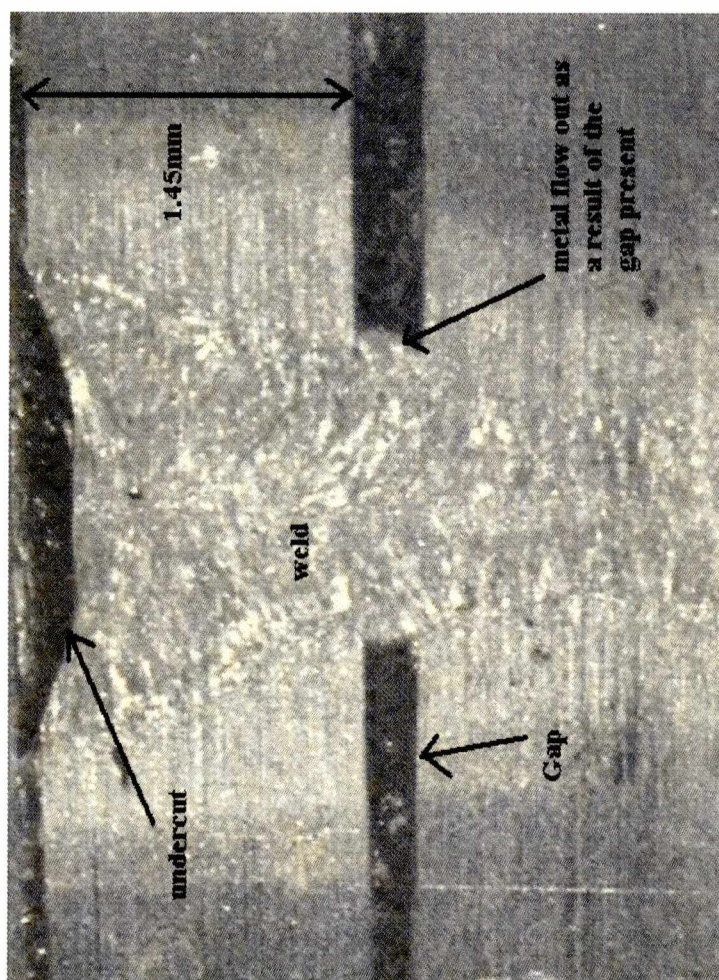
Gap Causing Undercut. Weld performed on 80Y90T autobody component using a CO2 laser and helium gas (1850W, 1000mm/min., +1mm focal position).
